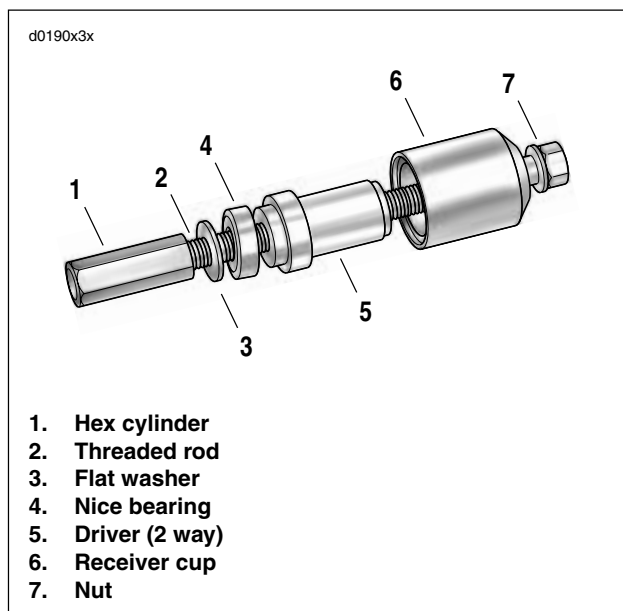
Connecting Rod Bushing Remover/Installer (Part No. HD-95970-32D)
